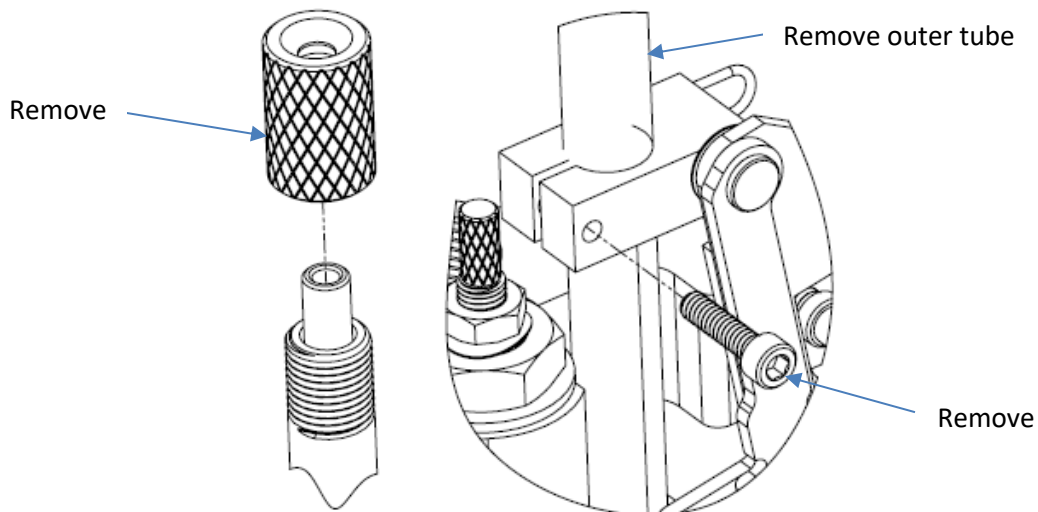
Removing low primer sensor and priming mechanism from priming tube
